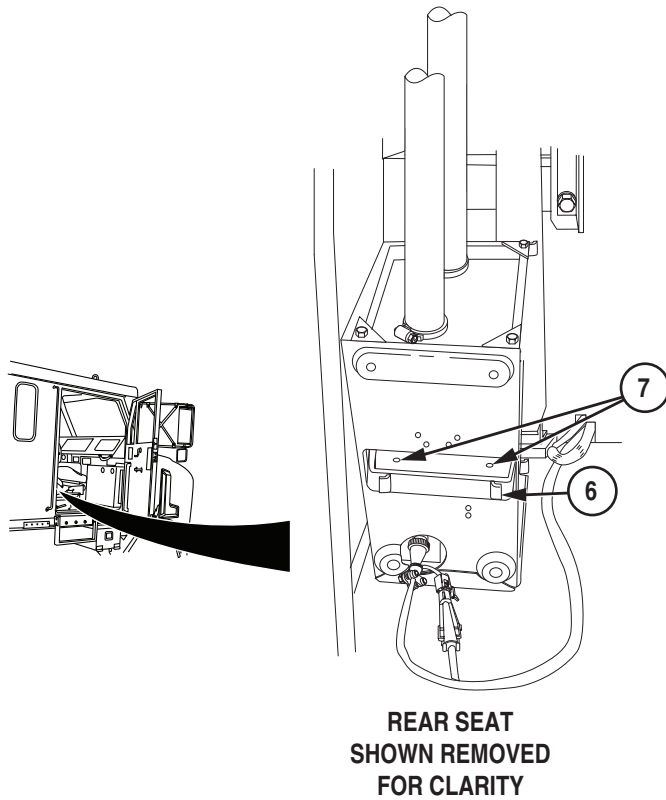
Gas Particulate Filter Hose Removal and Stowage.
